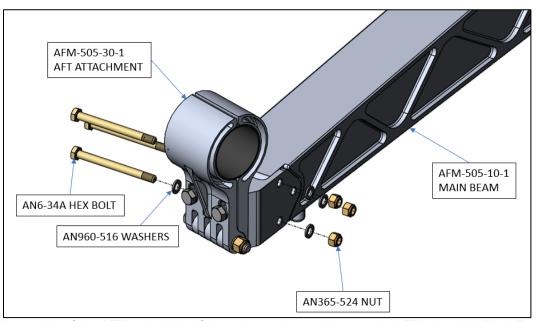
Assembly of the AFM-505-30-1 Aft Attachment Assembly onto the AFM-505-10-1 Main Beam
